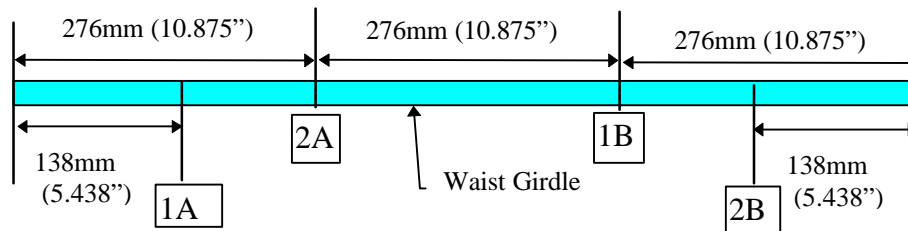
To make the Viking bumper you will attach the ends of one cross piece at 1A and the other end at 1B. The second cross piece ends attach at 2A and 2B.
